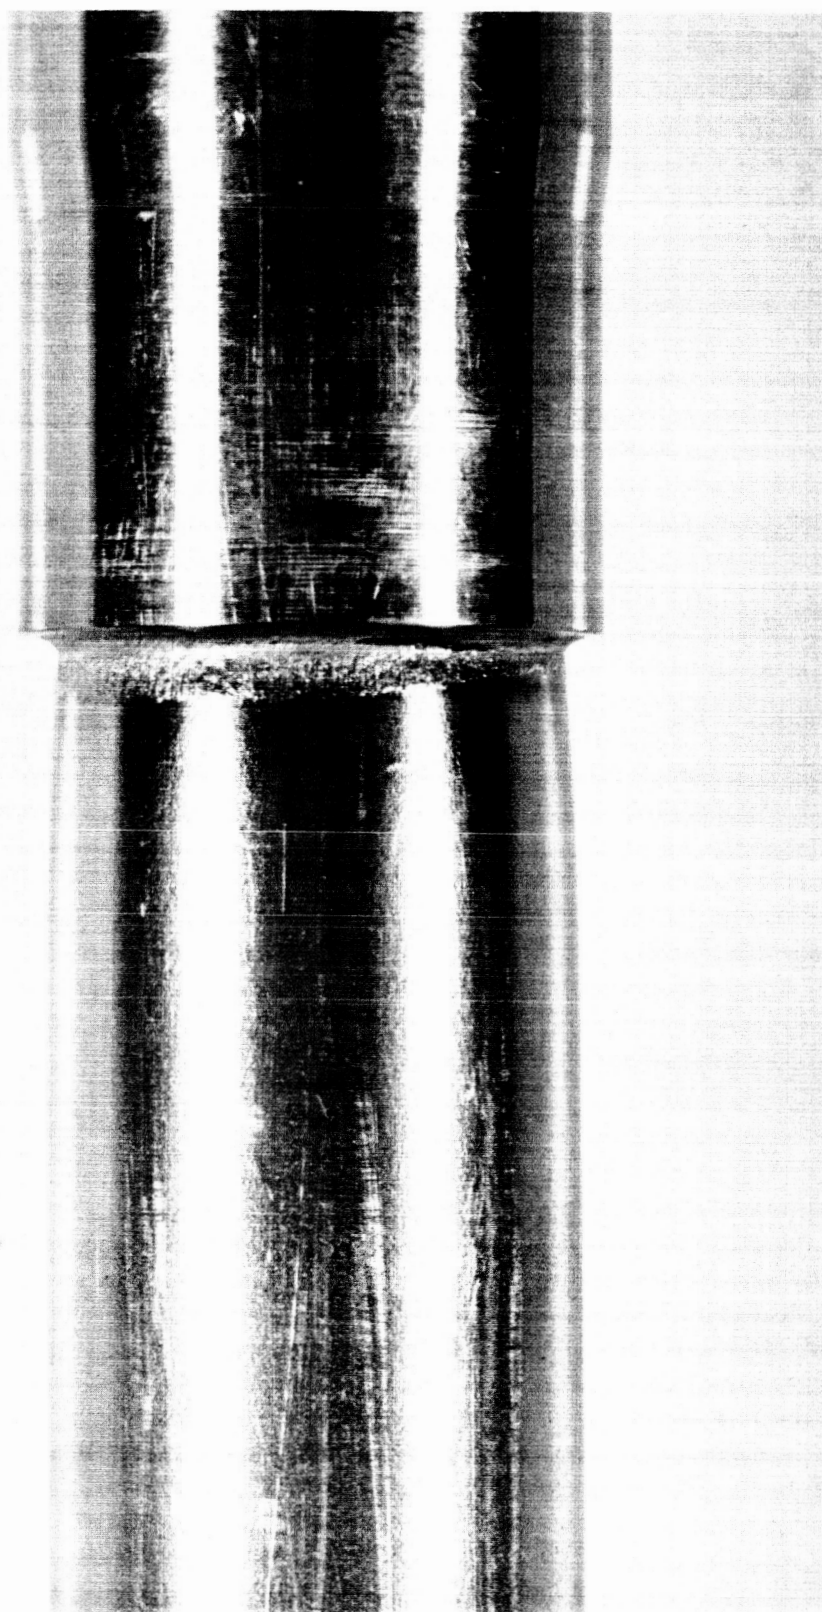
Electron Beam Weld after 15,000 psi pressure test.
